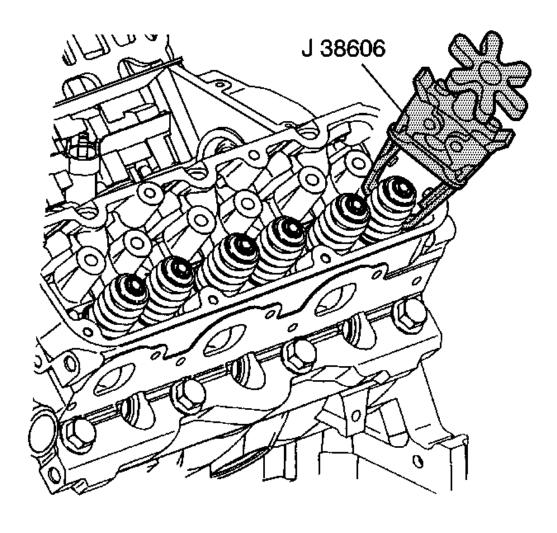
Compressing Valve Spring Courtesy of GENERAL MOTORS CORP.
